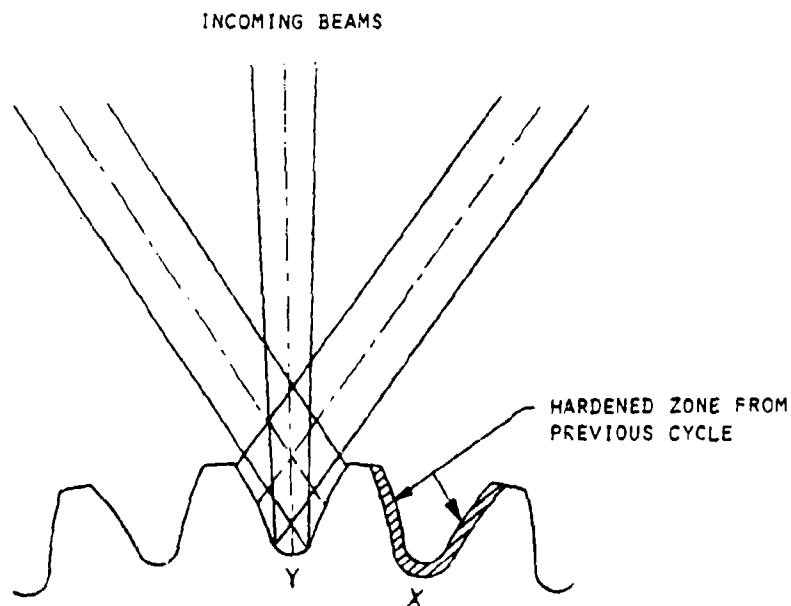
Laser hardening of gear teeth - Flank-Root-Flank (FRF) technique.
